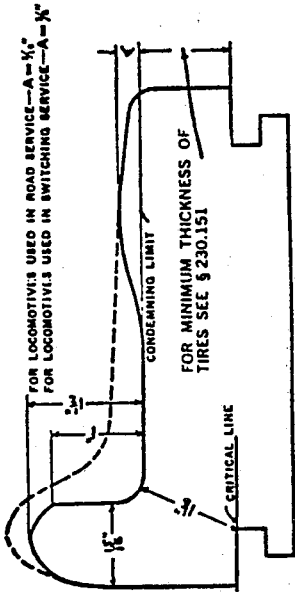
Steel tire. Retaining ring fastening. Driving and tralling wheels.
